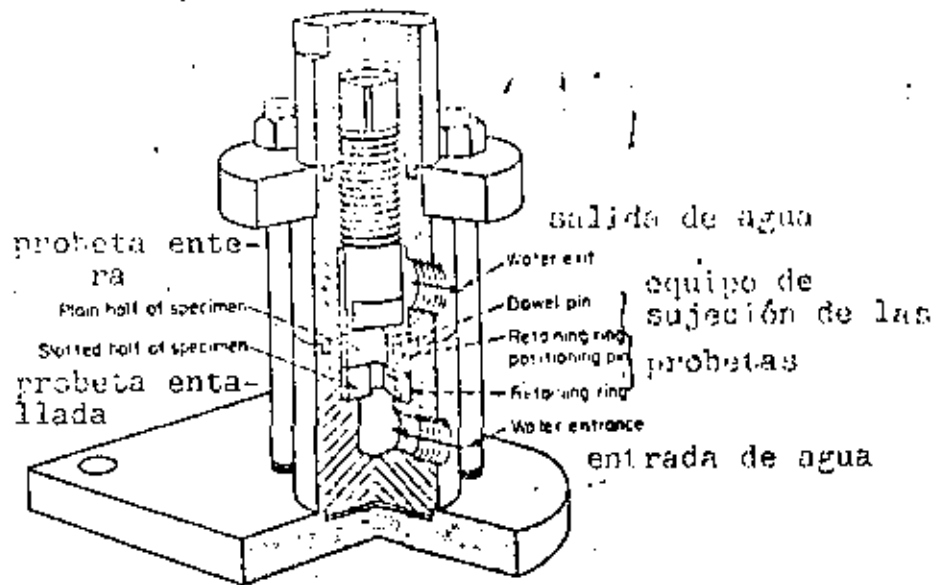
Sectional view of test unit for boiler feed-water.
